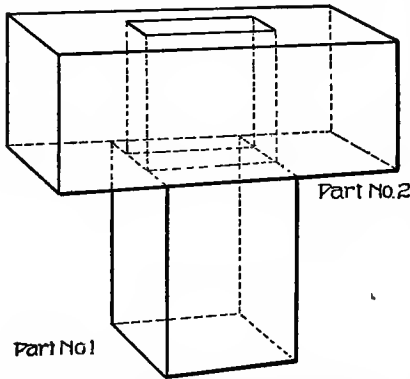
Perspective Drawing of Through Mortise and Tenon Joint
